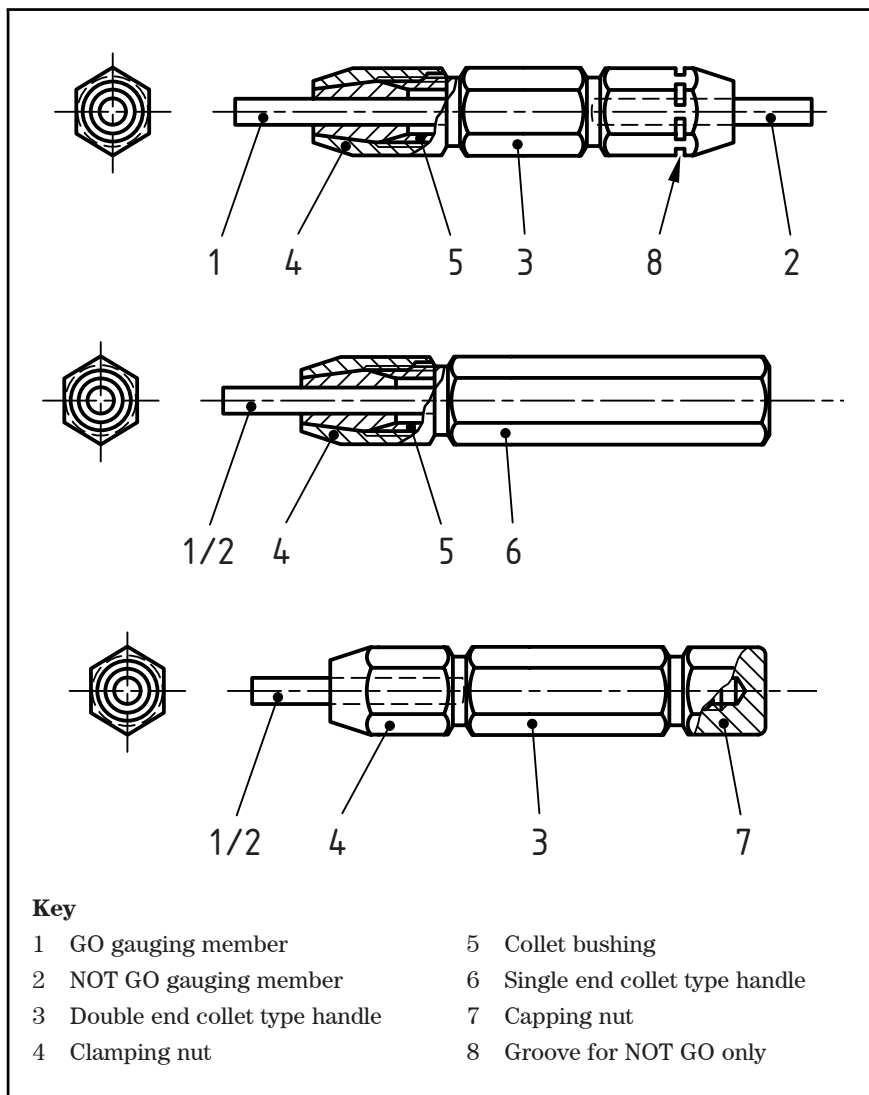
Collet type screw plug gauges (Range: above 0.030 in up to and including 0.760 in)
